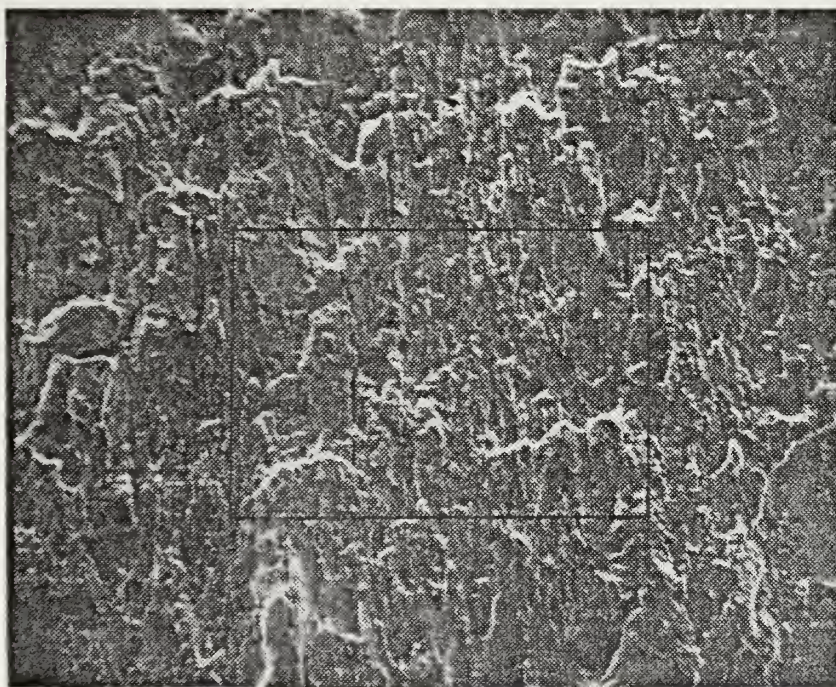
SEM fractograph of Fig. 48 specimen, shows mostly brittle fracture with cleavage facets and many secondary cracks. This area is outlined by rectangle in Fig. 48. X500.
